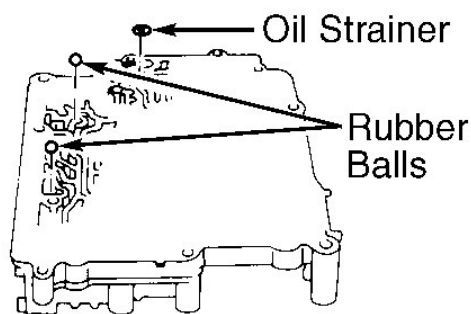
Locating Valve Body Components (FA4A-EL)
